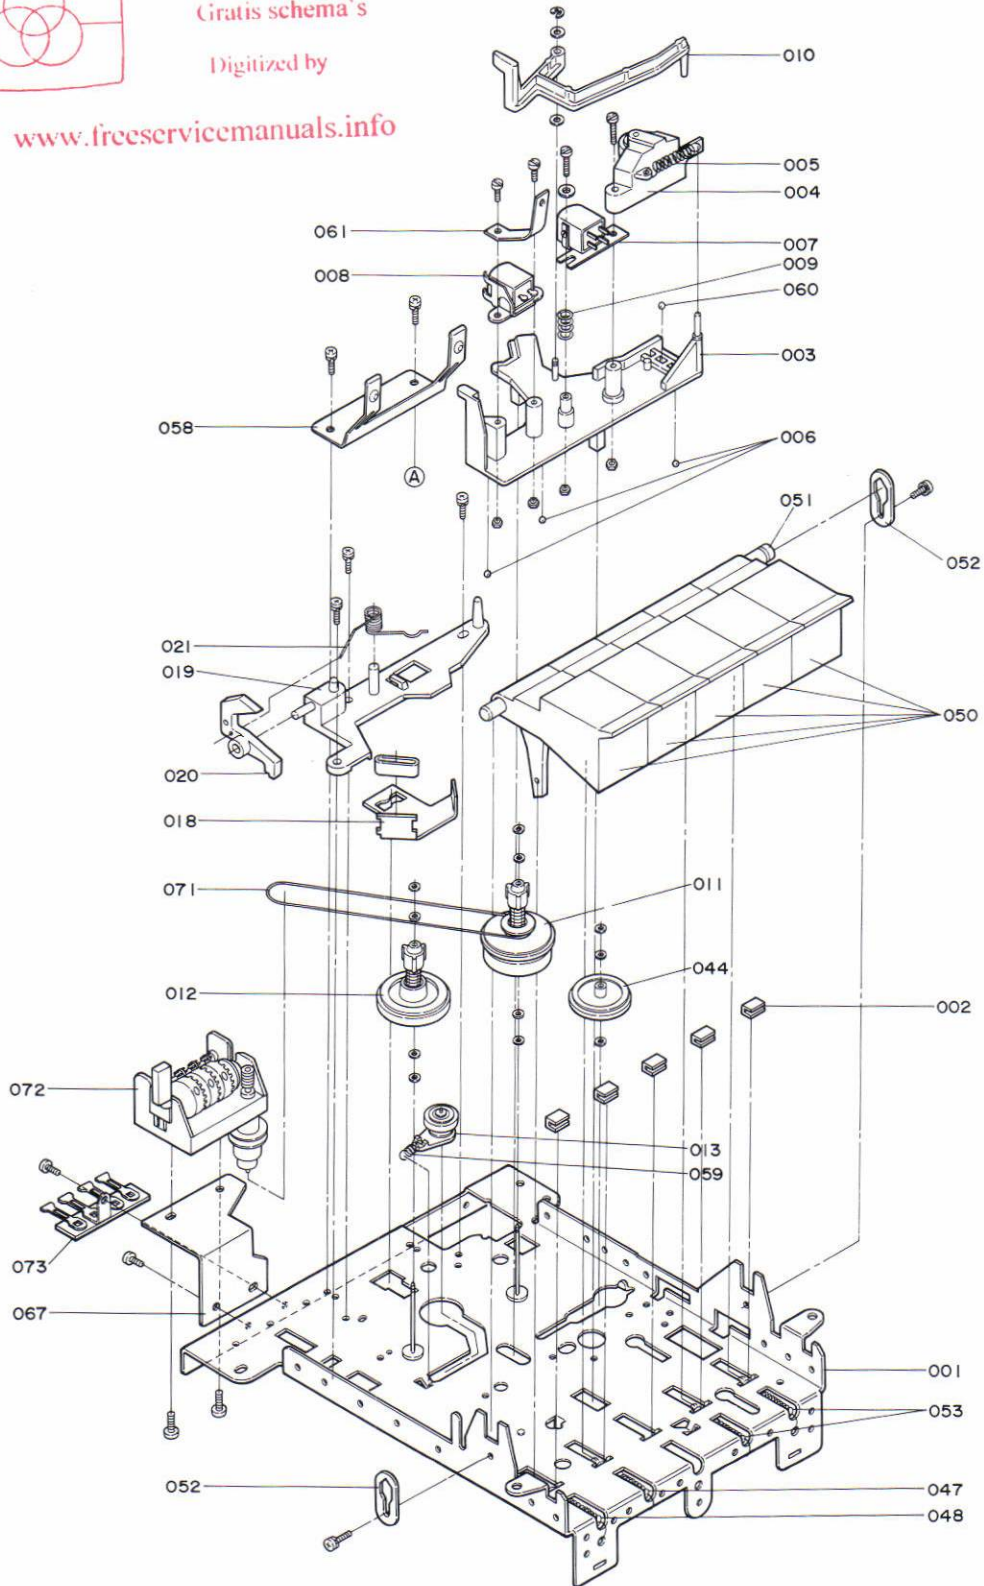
TAPE DECK MECHANISM EXPLODED TOP VIEW (SG-309H ONLY)
